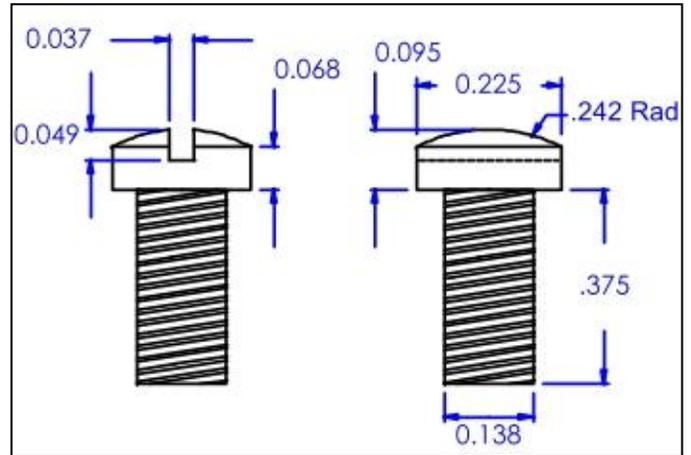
Construction drawing of the fusee iron mount, suspension bracket and motion works bridge screws. Material is 1/4" mild steel rod.
